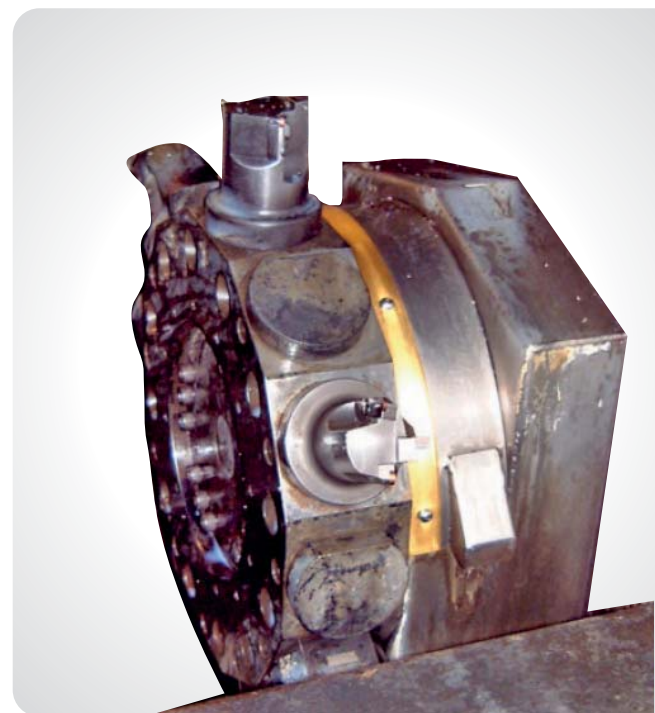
, More productive, more reliable, more economic: In a single production step, two round plates at the circumference bore the hole to finished size, an additional axial indexable insert machines the face on the gearwheels
